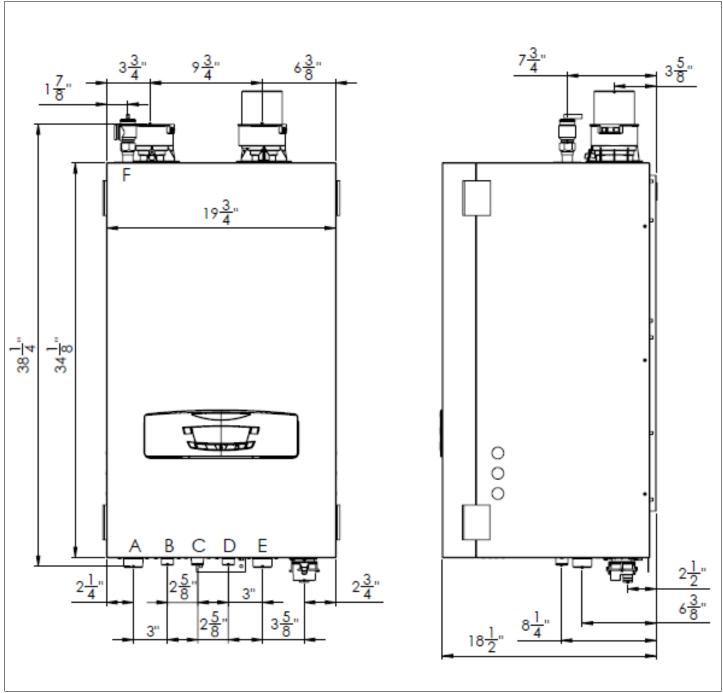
Boiler Dimensions – NOTE: All Dimensions Are Approximate
